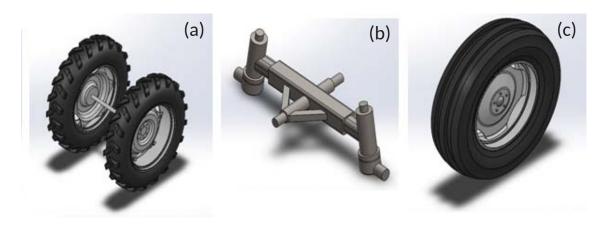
3D model of tractor components: a) rear axle with wheels; b) front axle; c) front wheel.
